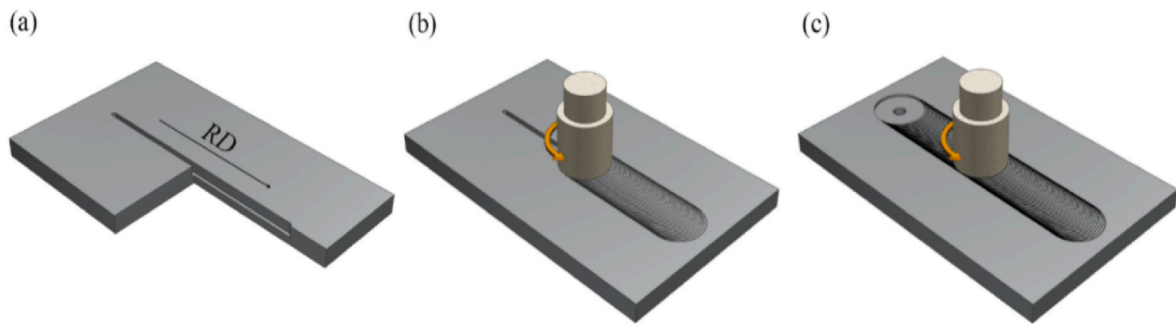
Friction stir composite: (a) sectional view of pre-grooved plate (b) closing the groove using a pin less tool (c) processing using a tool with a pin [33].
